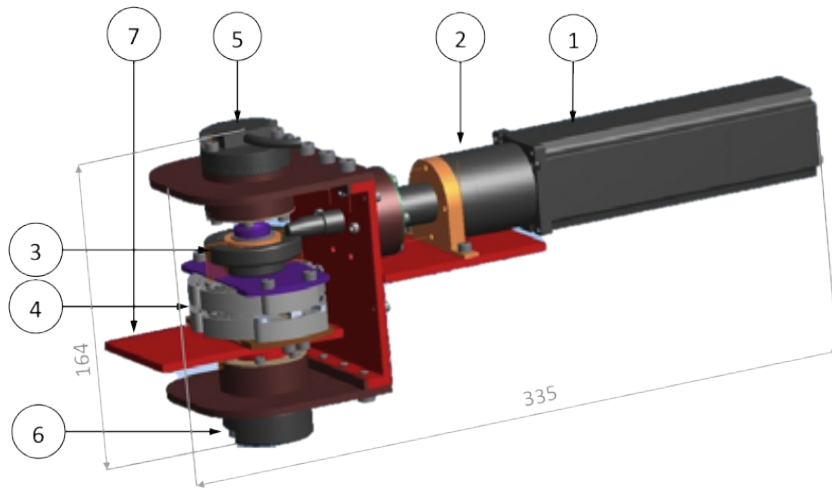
3D drawing of the rotary SEA. 1: DC motor, 2: planetary gear, 3: hypoid gear, 4: spring pack, 5-6: absolute encoders, 7: output link. Dimensions: $335 \times 164 \times 90 \text{ mm}^3$. Total mass: 3.1 kg.
